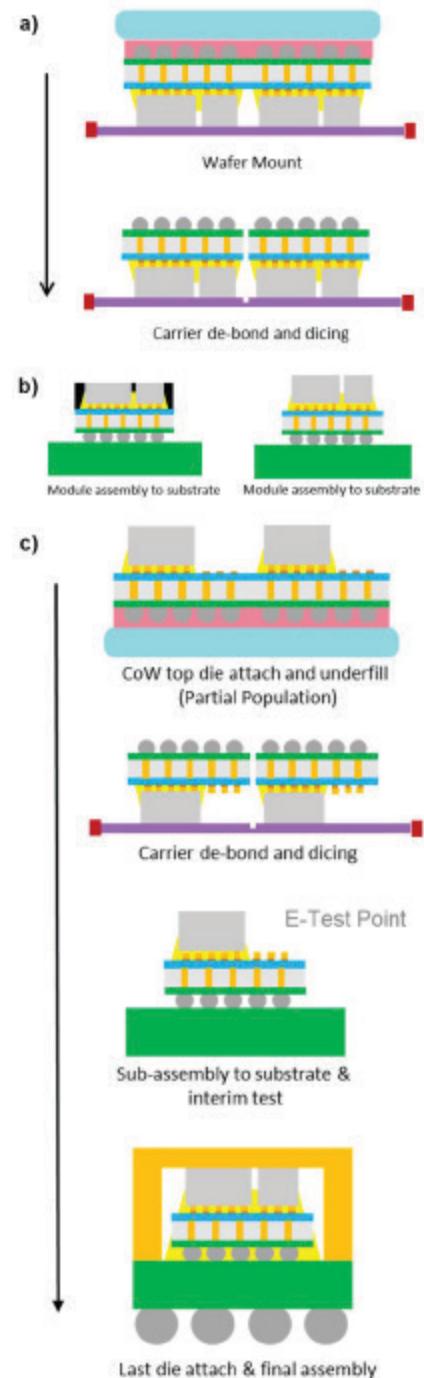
a) Wafer finish option of no-mold wafer for CoW; b) CoW module assembly – molded and no-mold module; c) CoW + CoS hybrid flow with eTest.
